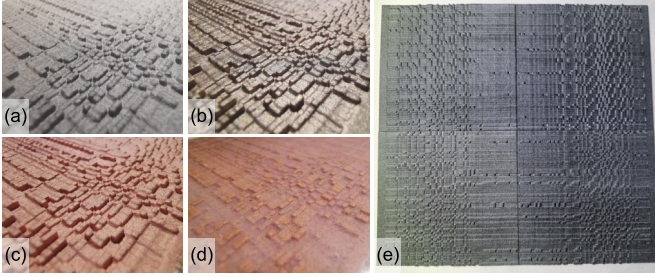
Illustration of the fabrication process of MILLIMIRROR. (a) After 3D printing. (b) After sputtering. (c) After electroplating. (d) After sealing with EcoFlex. (e) Scaling up MILLIMIRROR with small modules.
